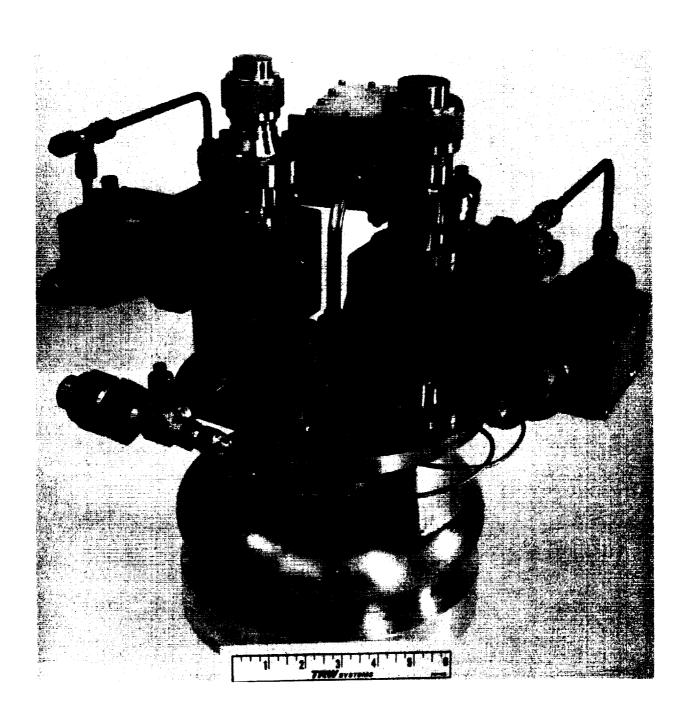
Head End Assembly, Electrical Ignition (TRW Supplied)
